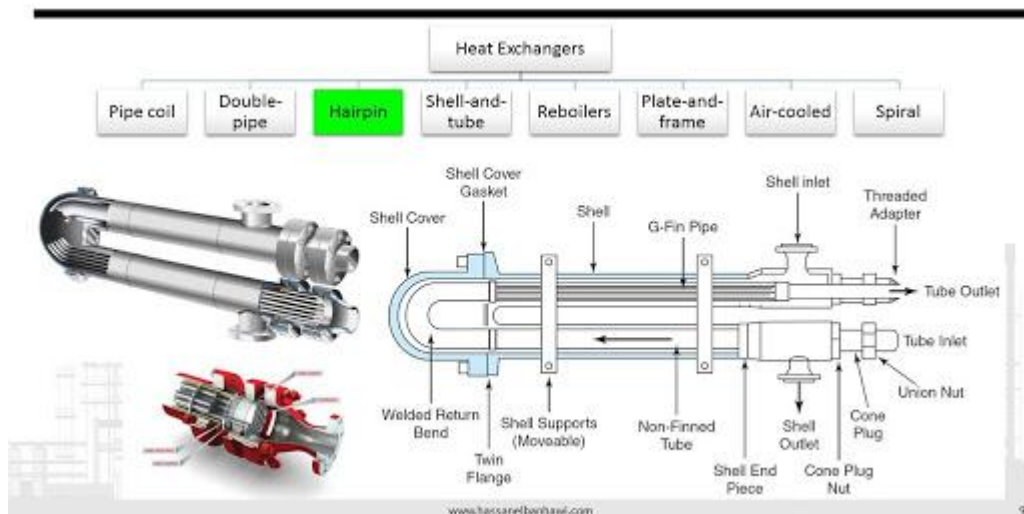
Constructional Design of Shell and tube heat exchanger.
